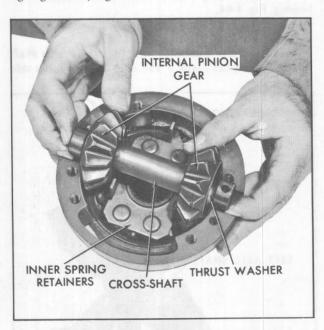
Removing and Installing Pinion Gears, Cross Shaft and Thrust Washers
